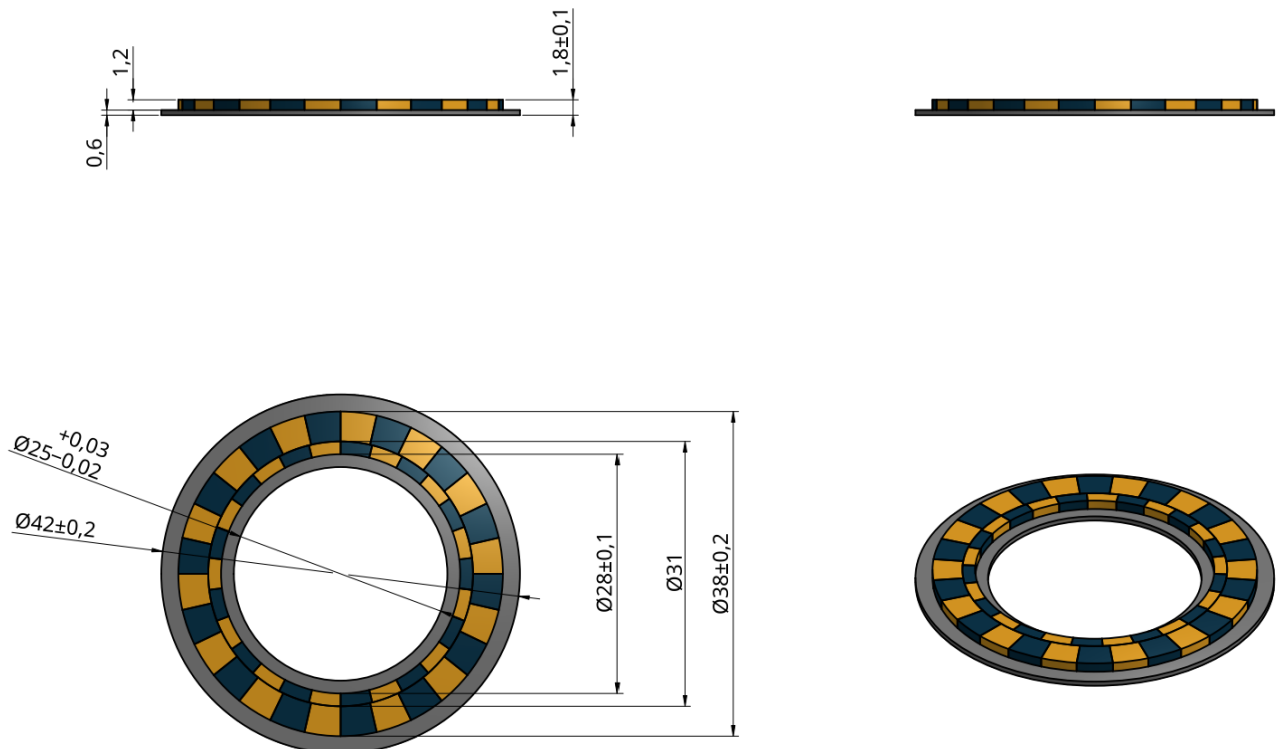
Dimensions of MLXMAGNT-VER-003. Unless specified otherwise, dimensions are millimetres.
